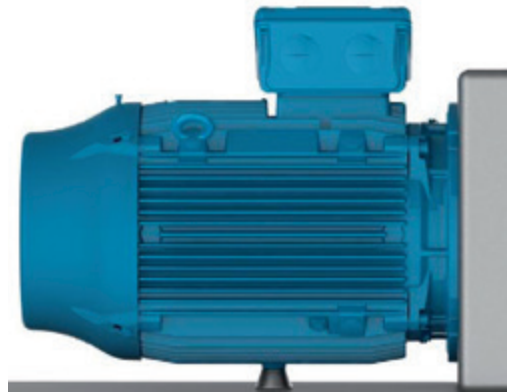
Mounting method of flange mounted motors with frame base support
